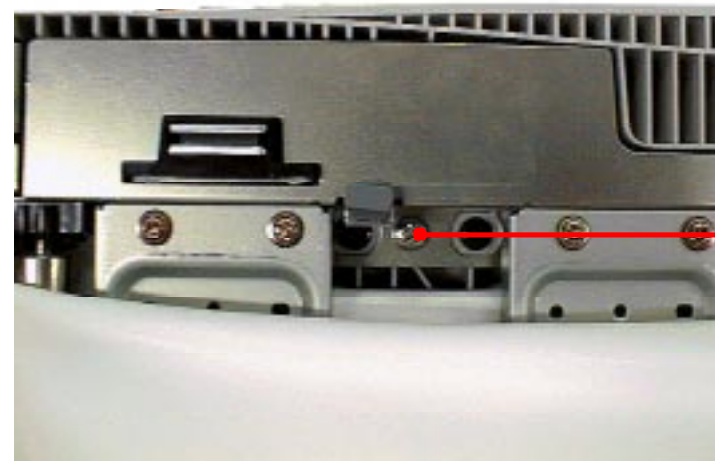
Transportation Belt Unit Fixing Screw Removal
